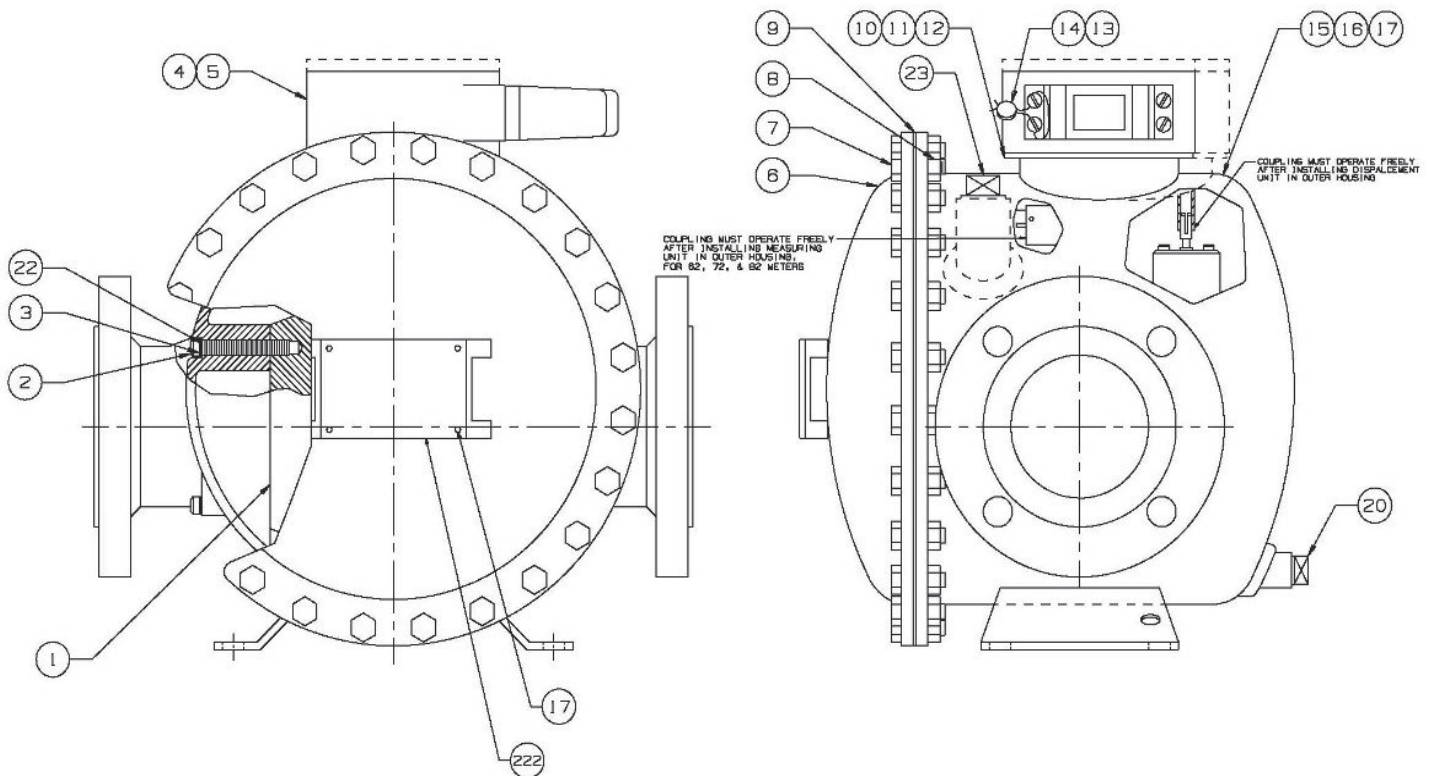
Complete Meter Assembly - B060, B070, B080, & B090
